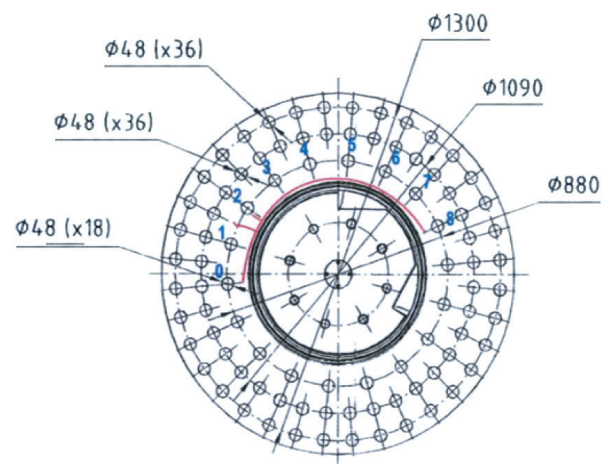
Side disc of hoist drum of hoisting machine in southern section (eastern side) with cracks marked (red) [2]
